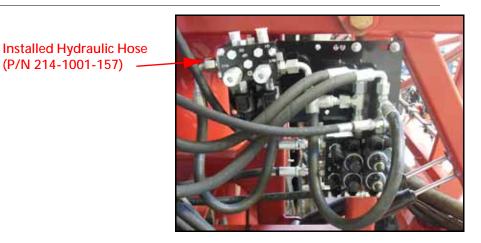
Pressure Hose Installed on AutoBoom Valve
